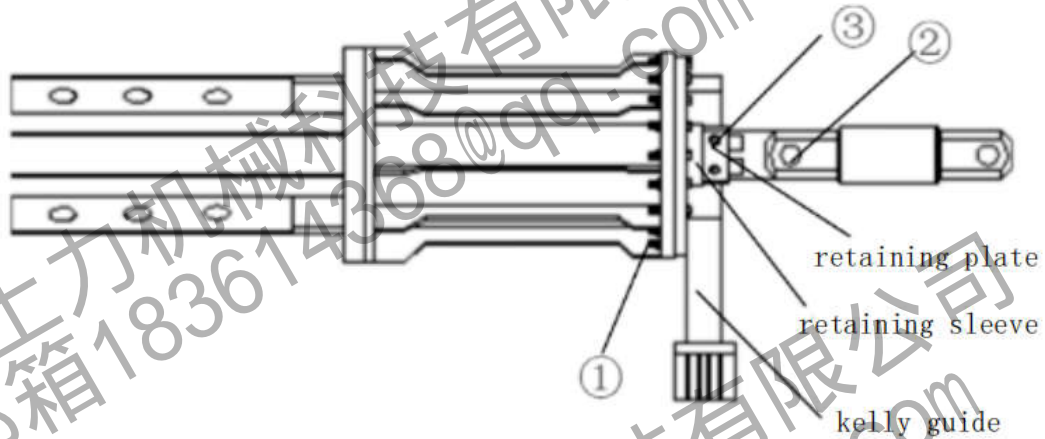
Schematic diagram of drill pipe disassembly and assembly
